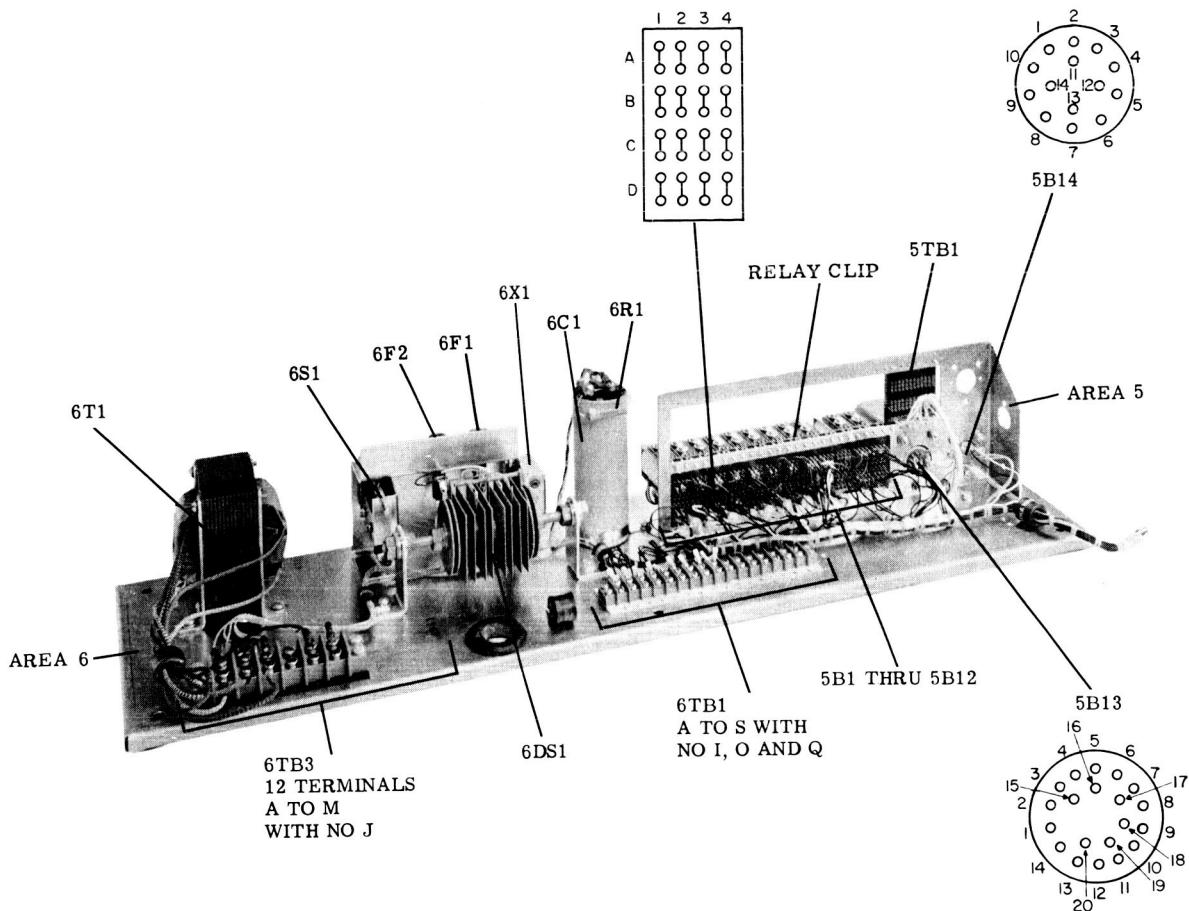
COMPONENT LOCATIONS, BERMUDA MAIN CHASSIS
